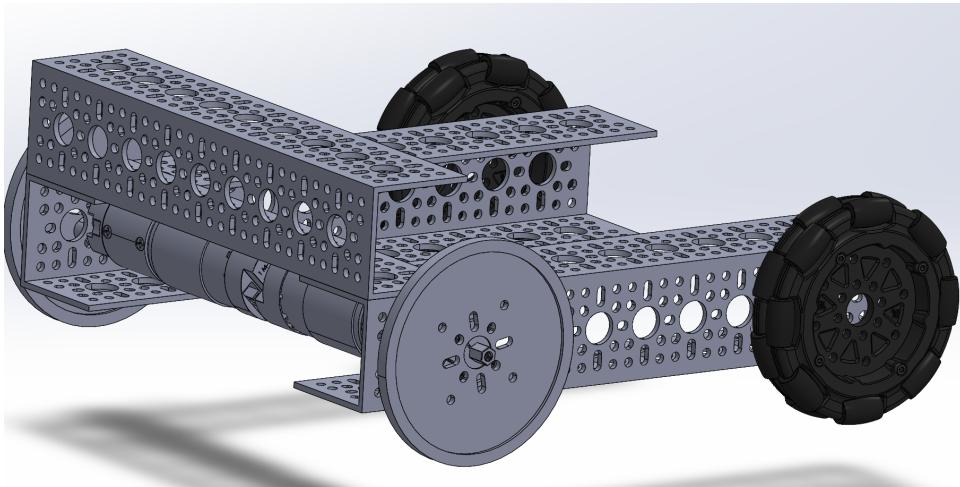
SolidWorks CAD model of the MEDS drivetrain, with example motors and wheels.
